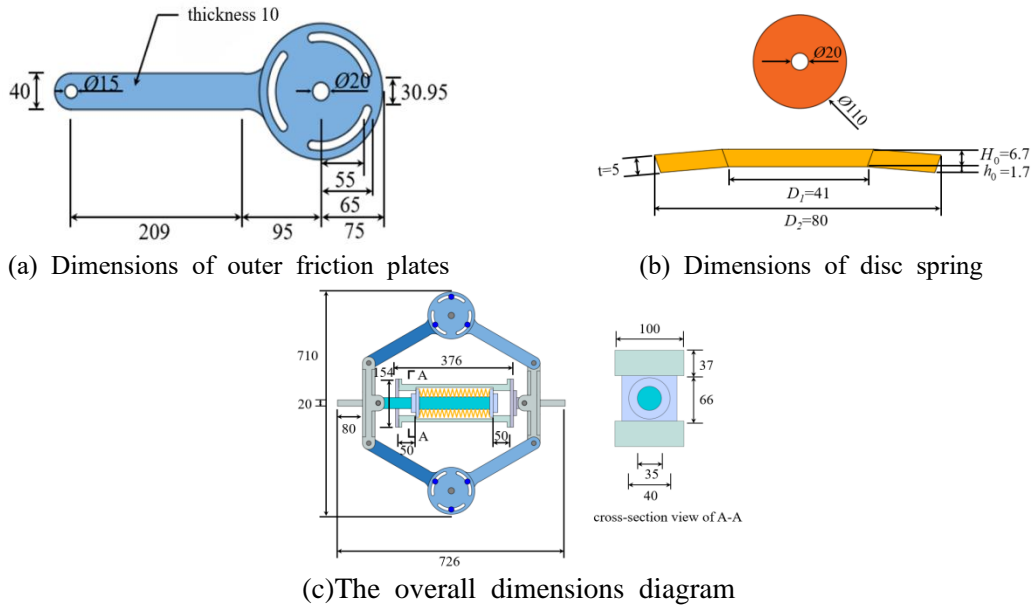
The dimensions of the RDAF-SCB bracing system (mm)
